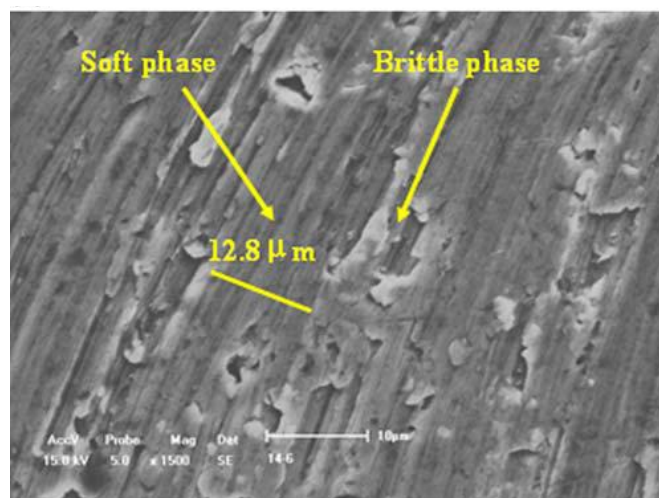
Machined surface by micro-milling on aluminum 6061 (Wang. 2007)
